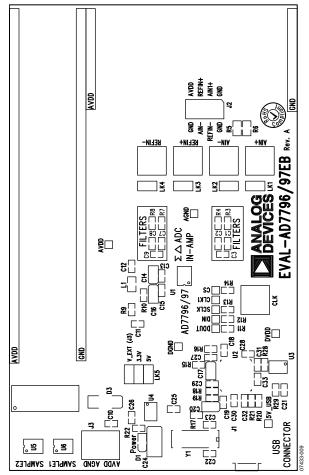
AD7796 Evaluation Board Component Layout Diagram
